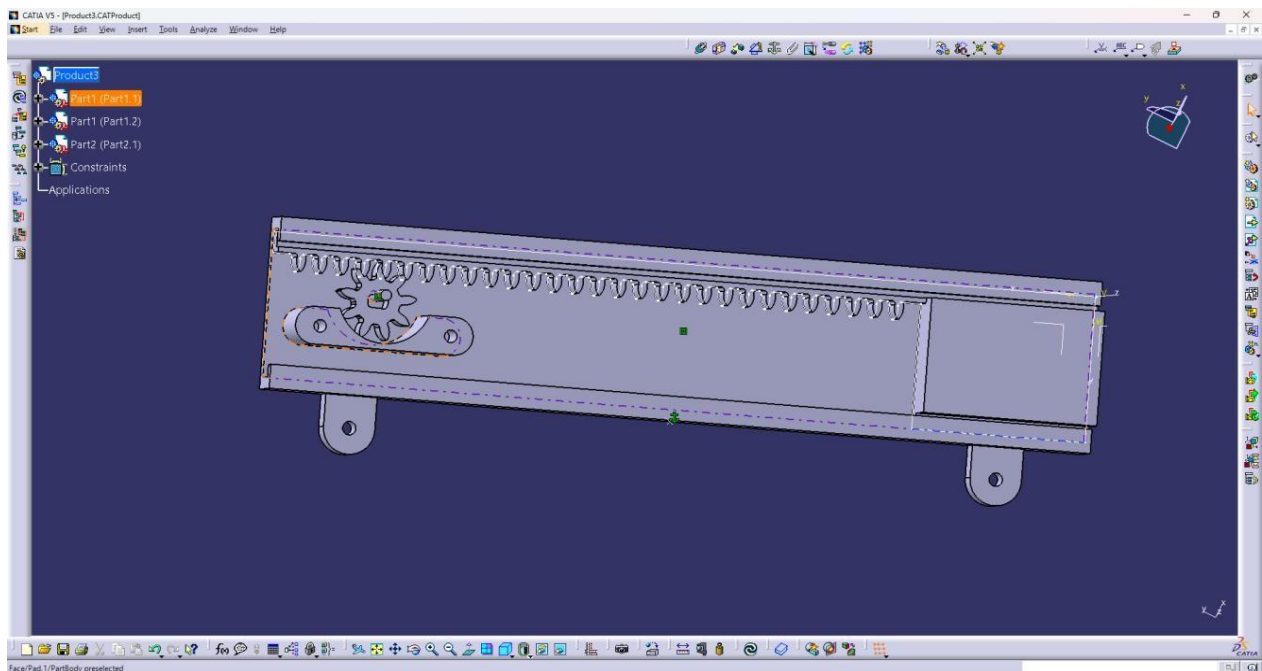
3D Printed CNC Plotting Machine- Assembly Design
